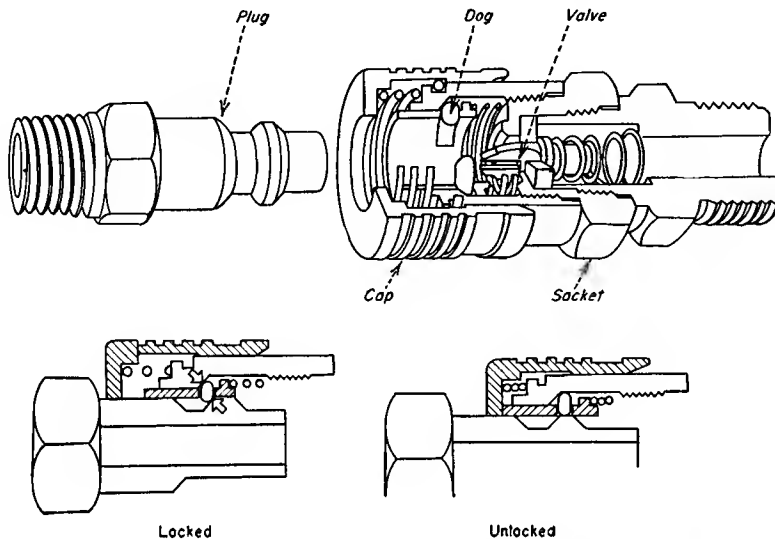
Air coupler that is full swiveling. Inserting plug into socket forces valve away from seat making connection. Dogs lock against plug and socket grooves at a 45 deg angle. (Note arrows in locked view.) To uncouple, cap is pulled back on socket and plug pops out allowing valve to reseal shutting off air. Socket must be connected to air source. *Foster Mfg. Co., Inc.
